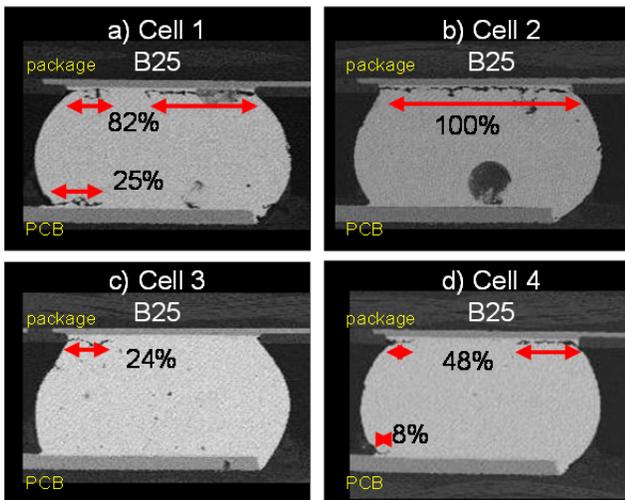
Cross-section of typical 512TEPBGA row B solder-joints after 3164 cycles. a) SAC387 0.5mm, PCB pad, b) SAC387 0.4mm, PCB pad, c) SnAg, 0.5mm, PCB pad, d) SnAg, 0.4mm, PCB pad,. All with 11mil thick die.
